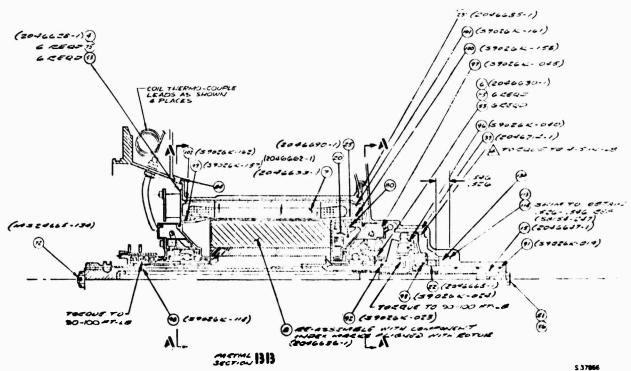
270 VDC Generator Assembly, PN 518989-1 (Sheet 1)
